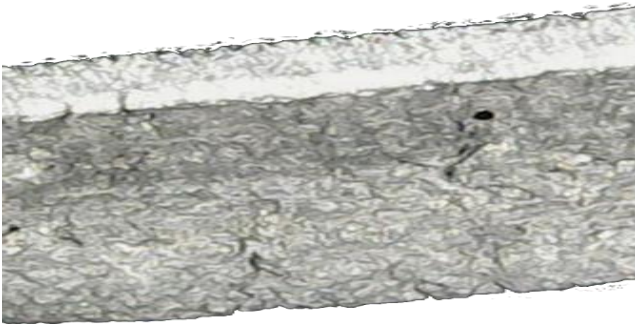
Cutting and shearing ratio, white bright section-upper side cutting (1/3), rest is shearing (2/3) of 1mm.
